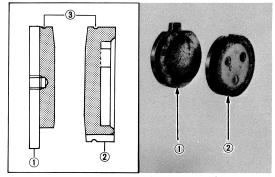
① Pad no. 2 ② Pad no. 1 ③ Red line
